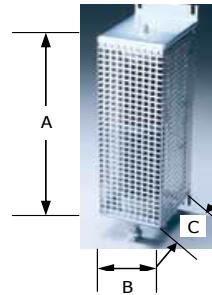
Dimensions of chassis braking resistors SK BR2/xxx/xxx-C
